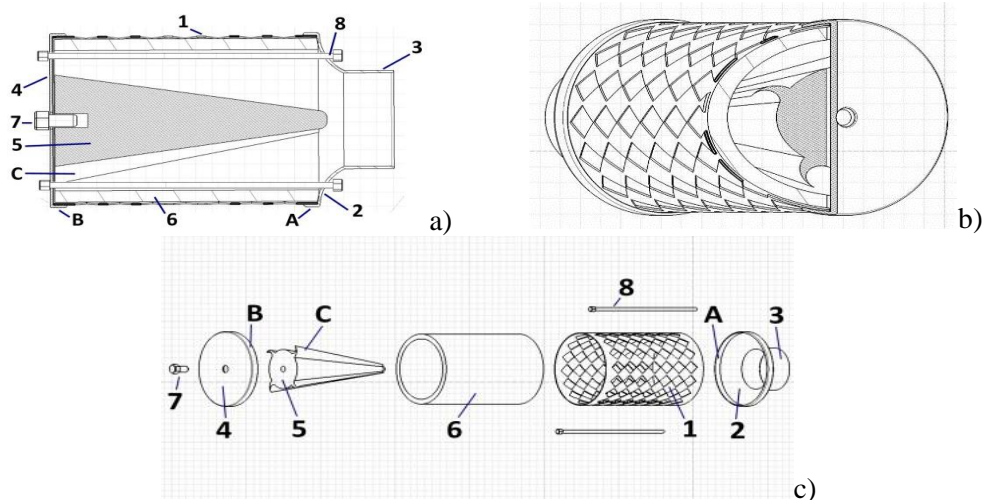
Super absorbing filter FSU 70 „Air by Corneliu”, the exploded model [1]
